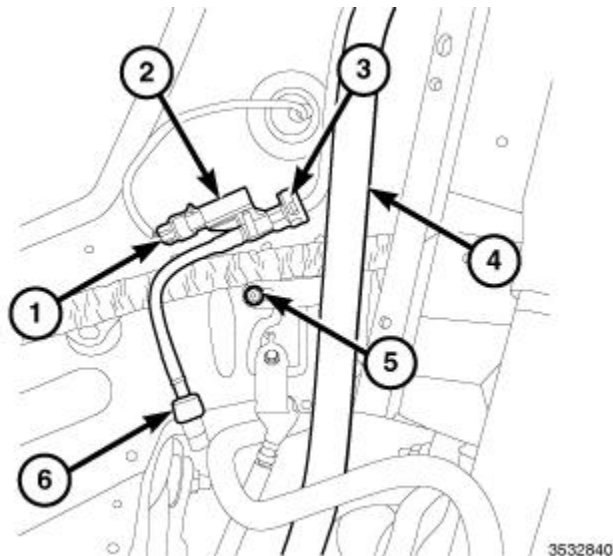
Fuel Tank Pressure Sensor Electrical Connector, Filler Tube & Fuel Tank Vent Steel Line
